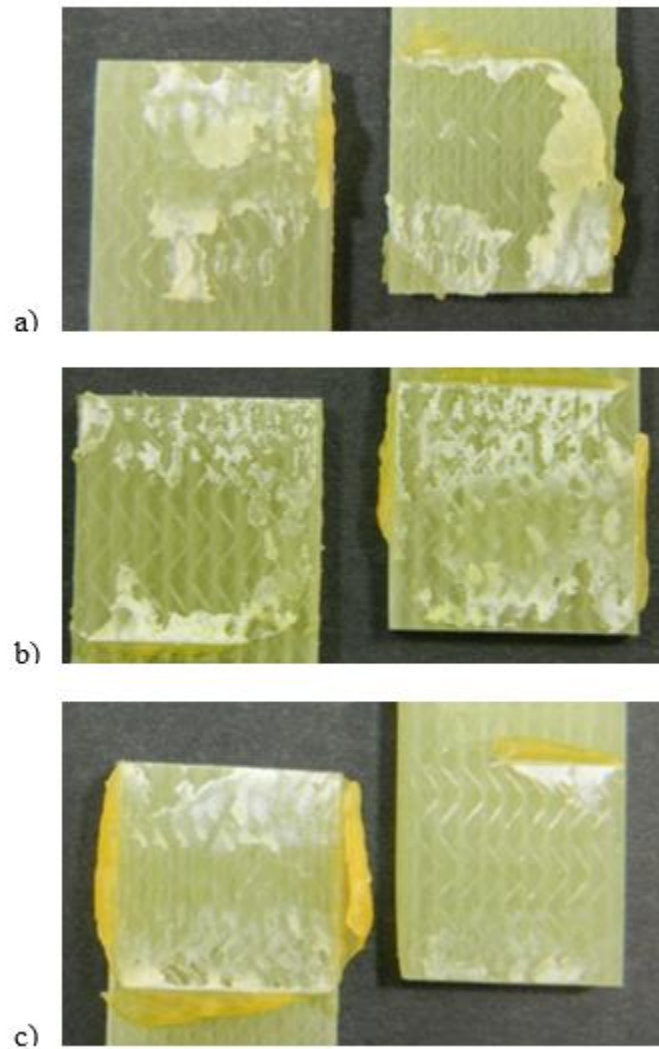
MMA adhesive fracture surfaces of specimens contaminated with hydraulic oil that were tested a) 2, b) 9, and c) 33 days after manufacture.
